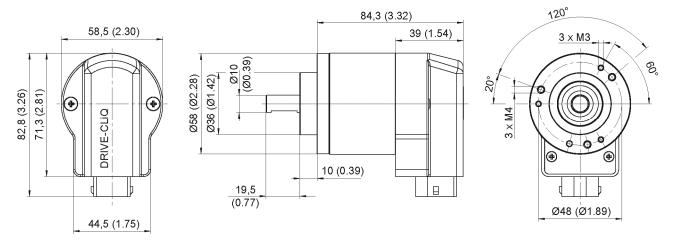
Dimension drawing of clamping flange, all data in mm and (inches)
